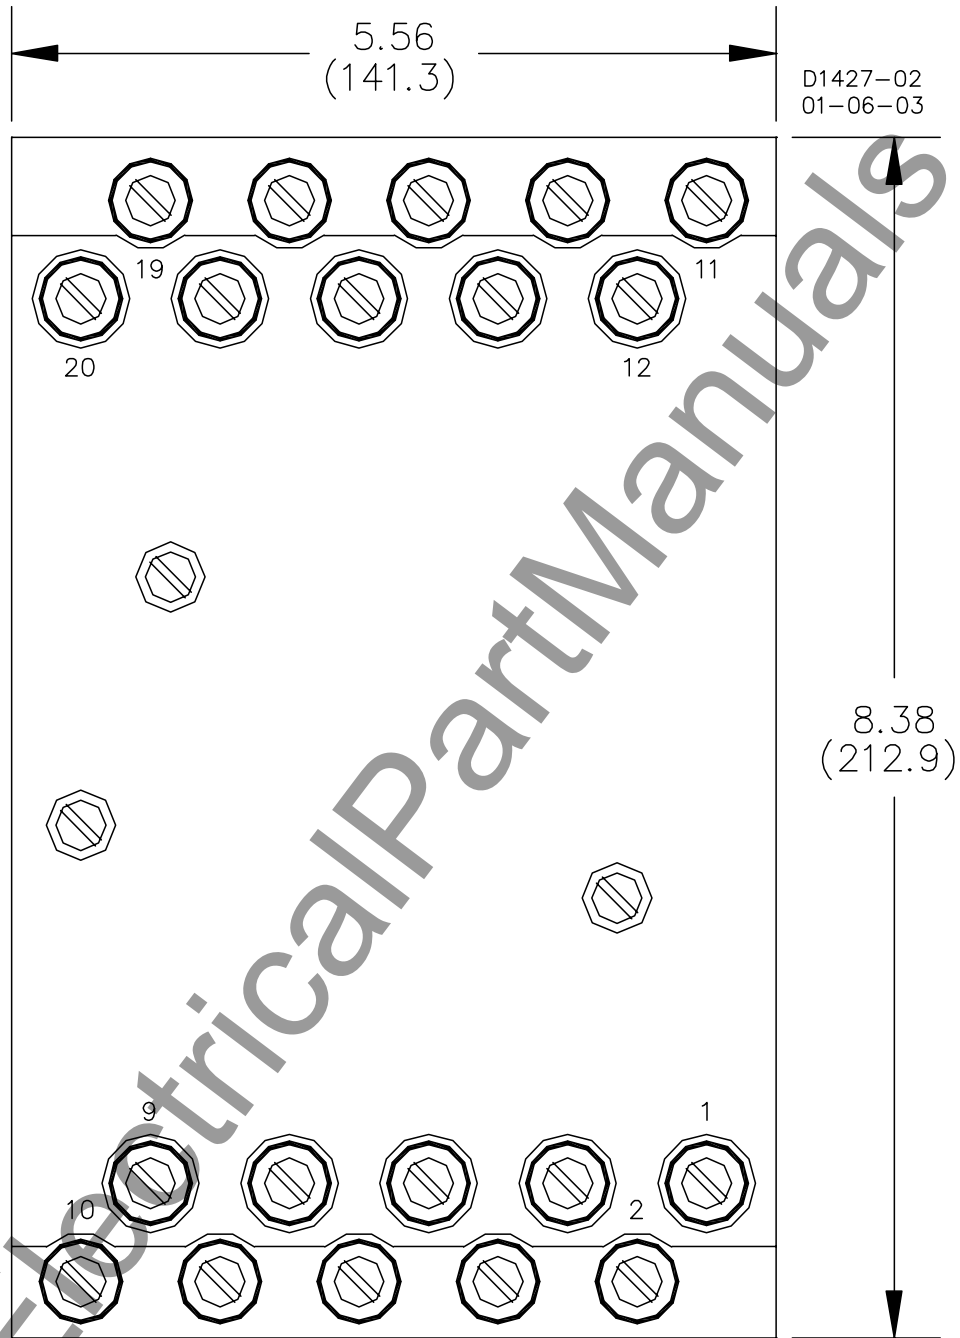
S1 Case, Double-Ended, Outline Dimensions, Rear View
